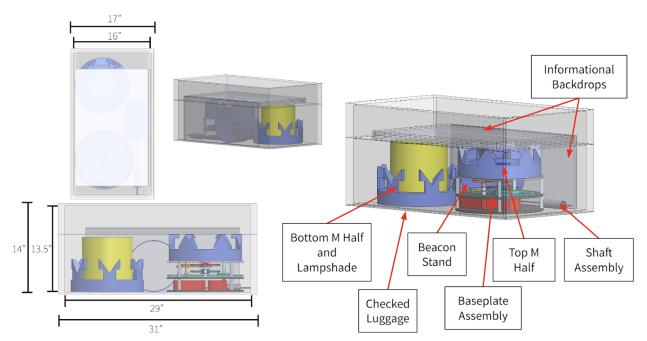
CAD packaging analysis of The Beacon and informational display. Note the highlighted assemblies and components are laid out in the CAD: the bottom M half and lampshade, shaft assembly, baseplate assembly, top M half, beacon stand, and informational backdrops. We intend to also support the components using foam to secure them in place and prevent damage while traveling.
